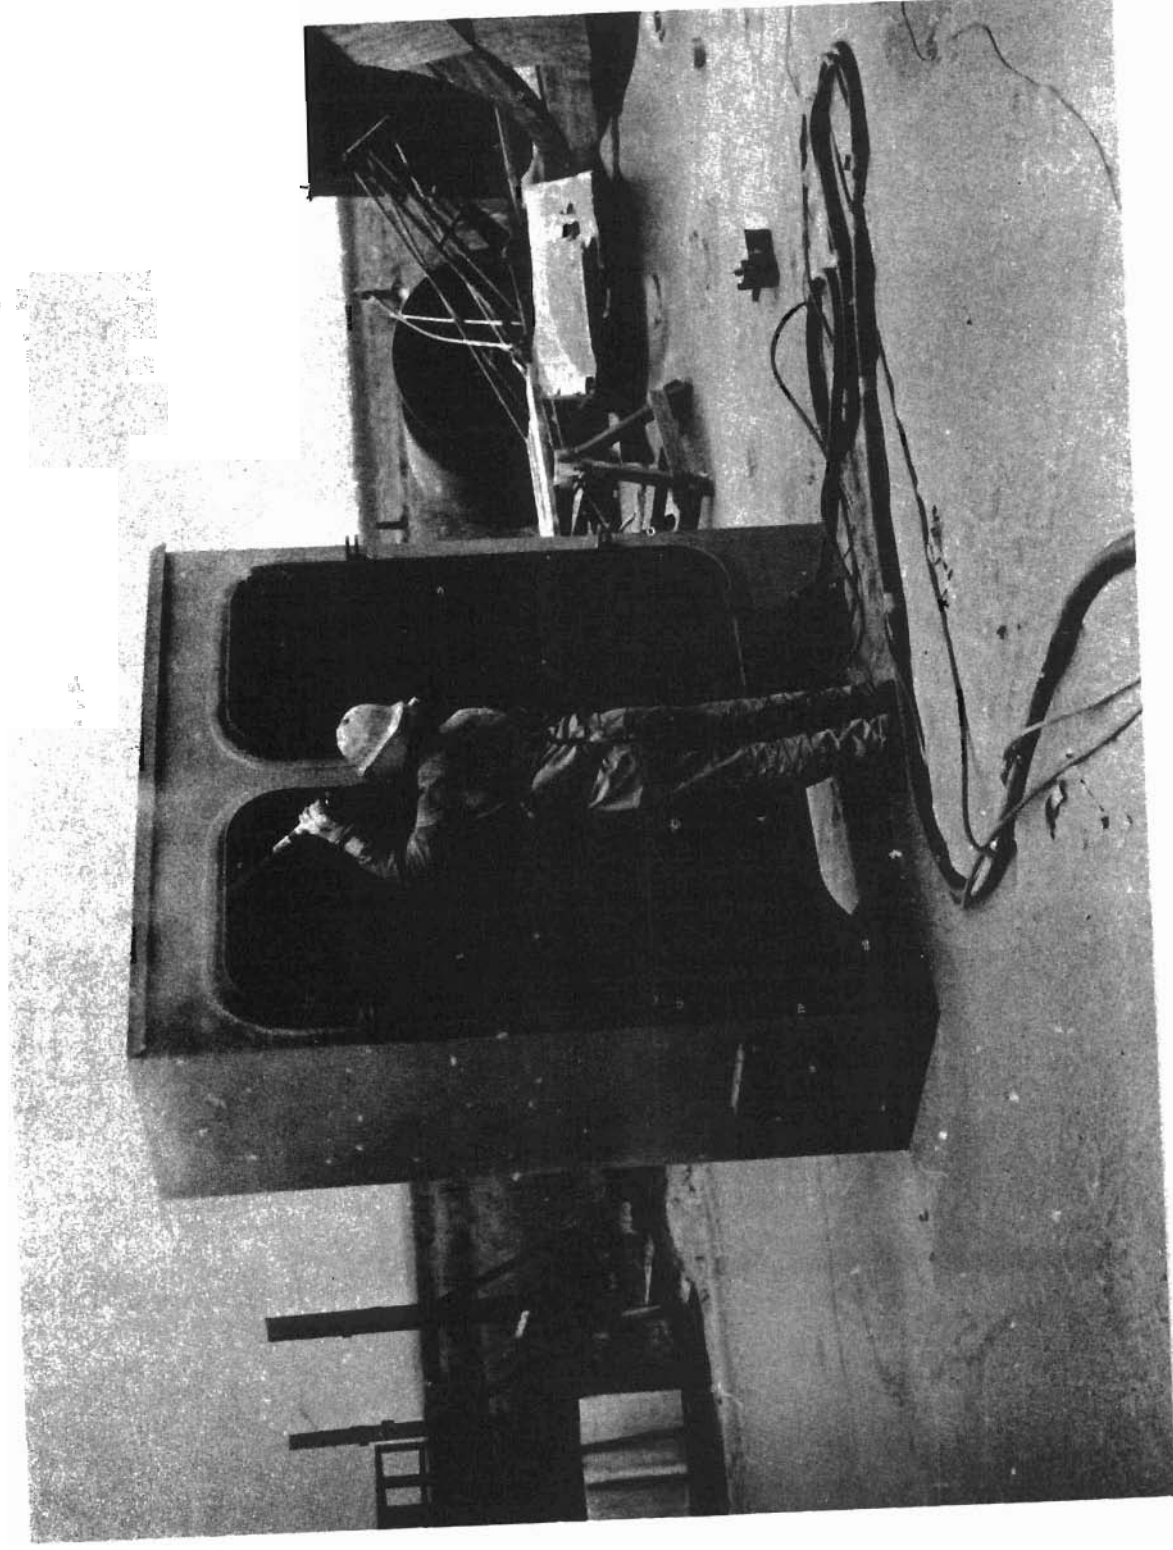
PORTABLE BLAST CLEANING MACHINE, HAND-HELD NOZZLE (Installation P-6)
